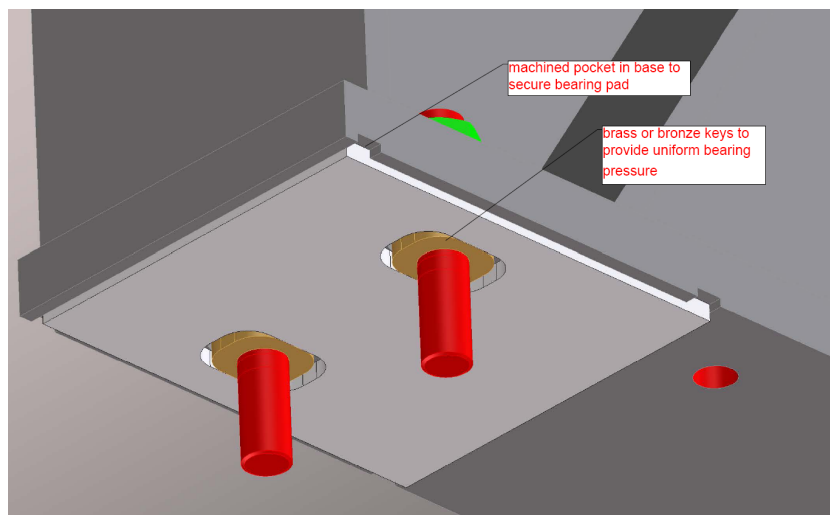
Vessel (quasi) Kinematic Support design Bottom Detail
